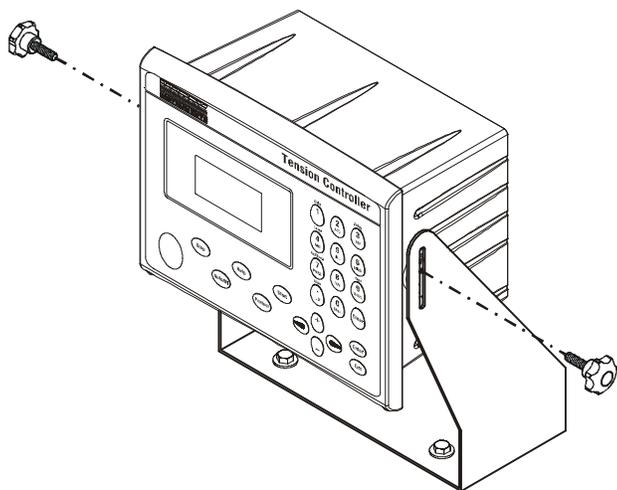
TENSION CONTROLLER INSTALLING IN A SWIVEL MOUNT
